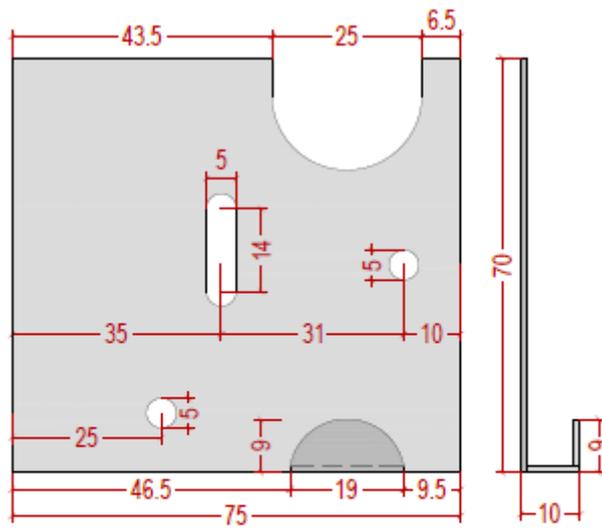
Technical drawing of the skin element fixing CRM.03A
